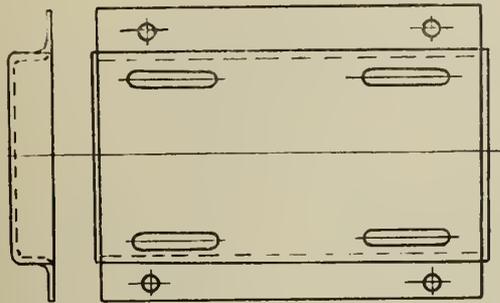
Bending and Welding Combined to Produce Substantial Bedplate.
